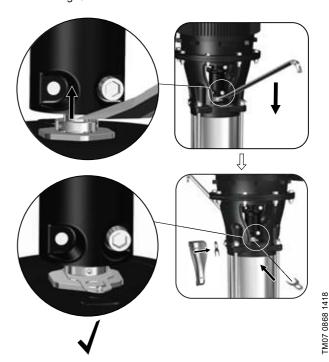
Lifting pump shaft and fitting adjusting fork.
